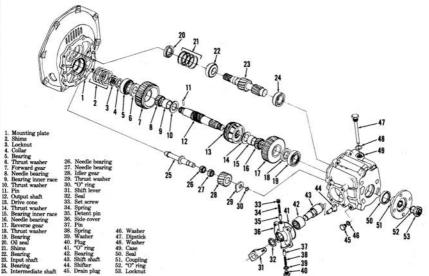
Exploded view of KM2-A and KM3-A transmissions.
